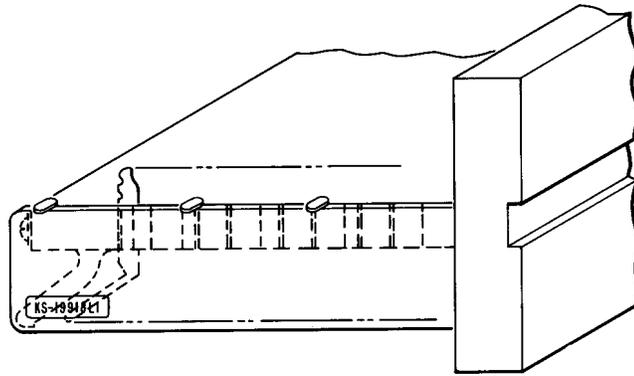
Method of Mounting KS-19918 L1 Guard on Terminal Strips
